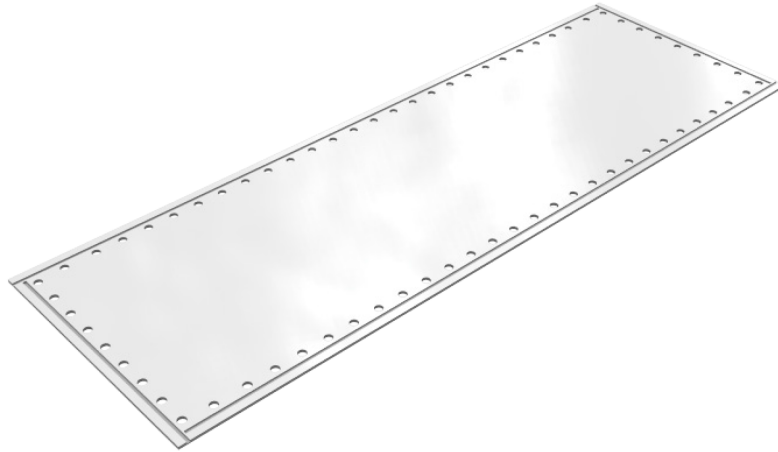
1/4" plate test specimen –bolt holes and keyways are apparent.
